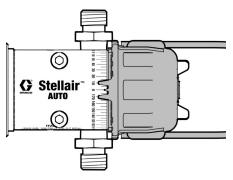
Alignment Tool on an Air Cap in the Vertical Position (0°)
